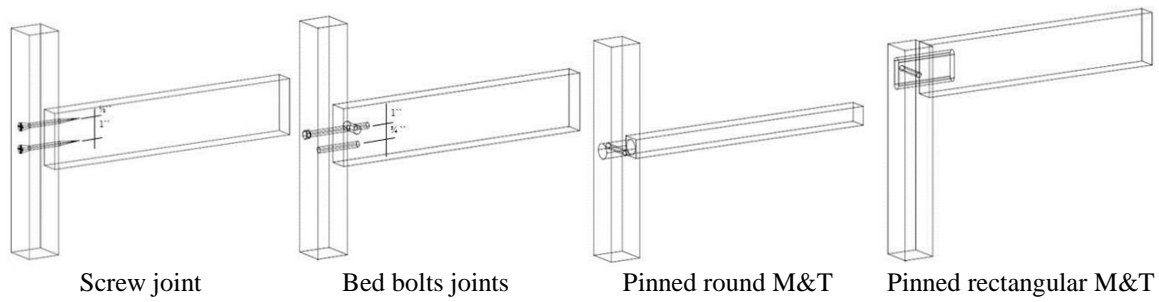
Ready-to-Assembly joinery systems specimen configuration for static joint load test.
